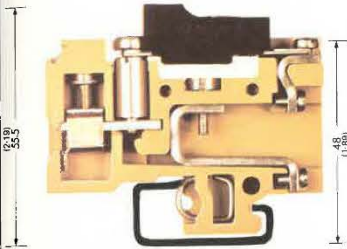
Fuses/Fuse Holder Assembly c/w Field Wiring
